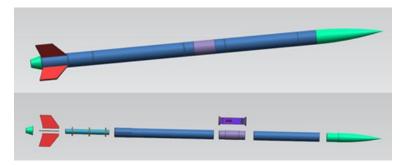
CAD of Full Rocket (Top), Exploded View of Full Rocket (Bottom)
